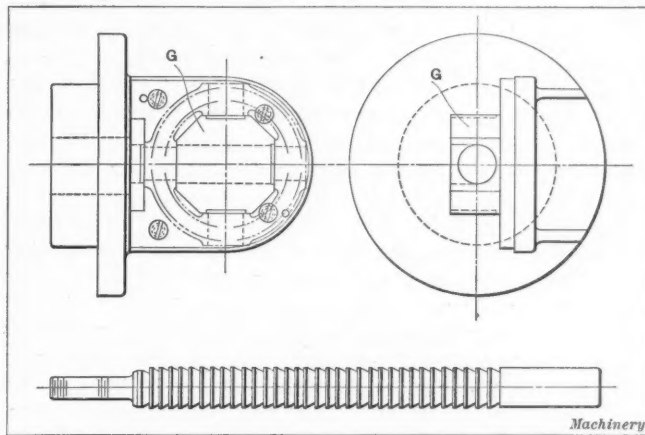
Broach and Fixture used for broaching the Four Holes in the Forgings
